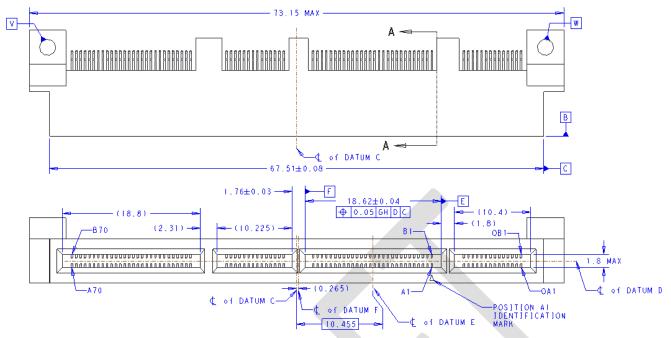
4C+ STRADDLE MOUNT CONNECTOR DIMENSIONS - FRONT VIEW (MM)
